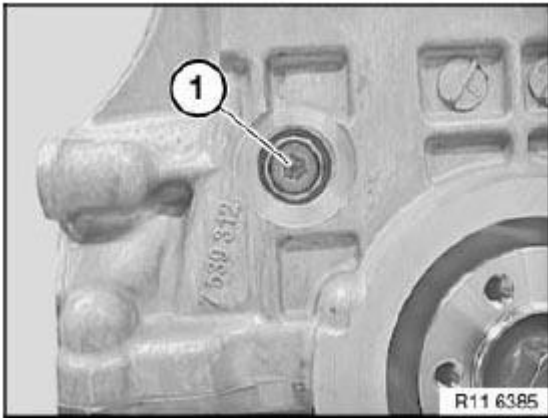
Identifying Bearing Pin From Timing Chain Module On Crankcase
